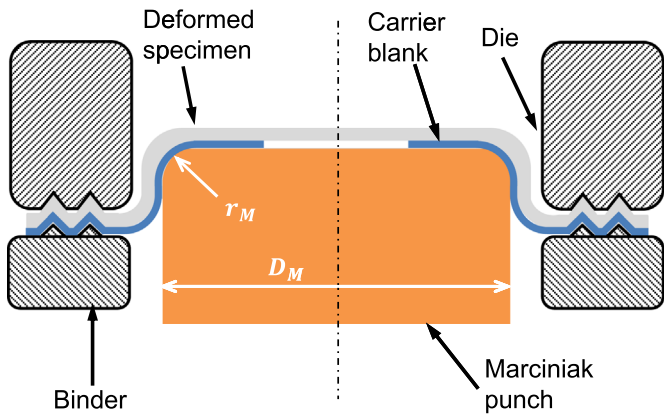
Illustration of the Marciniak test. Note that two Teflon films (not shown) as lubricant were inserted between the punch and carrier blank, and the conventional deep single-drawbead was modified to shallow double-drawbead to avoid fracture but lock the sheets at binder area during testing.
